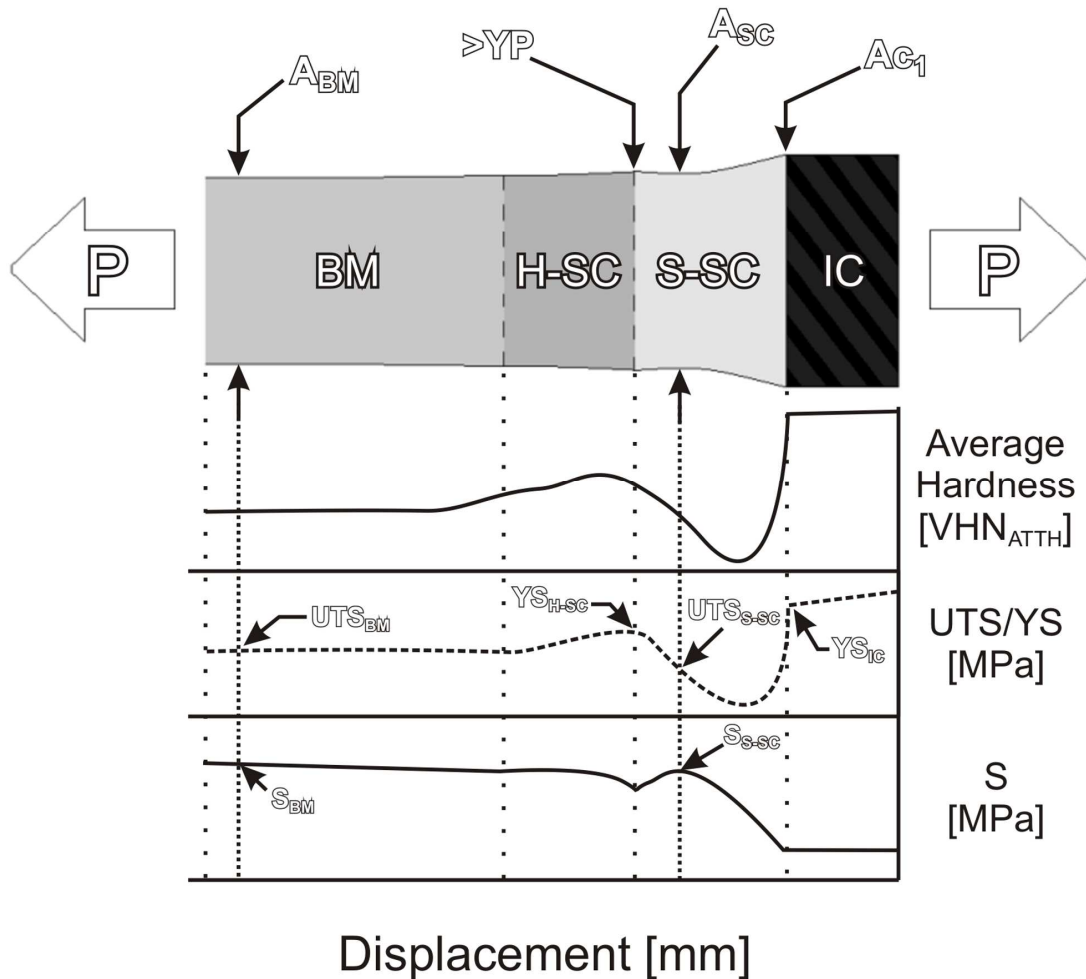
The general mechanism during diffuse necking that occurred during uniaxial transverse weld tensile testing of pulsed-GMA welded 1.65 mm thick Cr-Mo DP600 sheet steel. The schematic drawing depicts a typical longitudinal section of a weld from the IC region to the BM.
